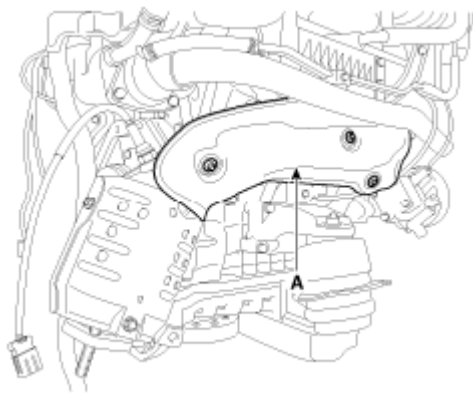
Identifying RH Exhaust Manifold Heat Protector
